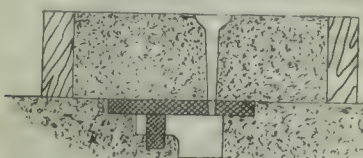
SECTIONAL VIEW OF MOULD READY FOR POURING.
